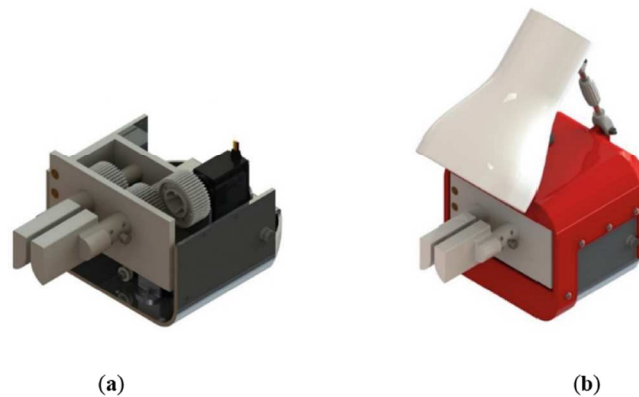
Assembly for End-effector: a) Internal part assembly; b) External part assembly
